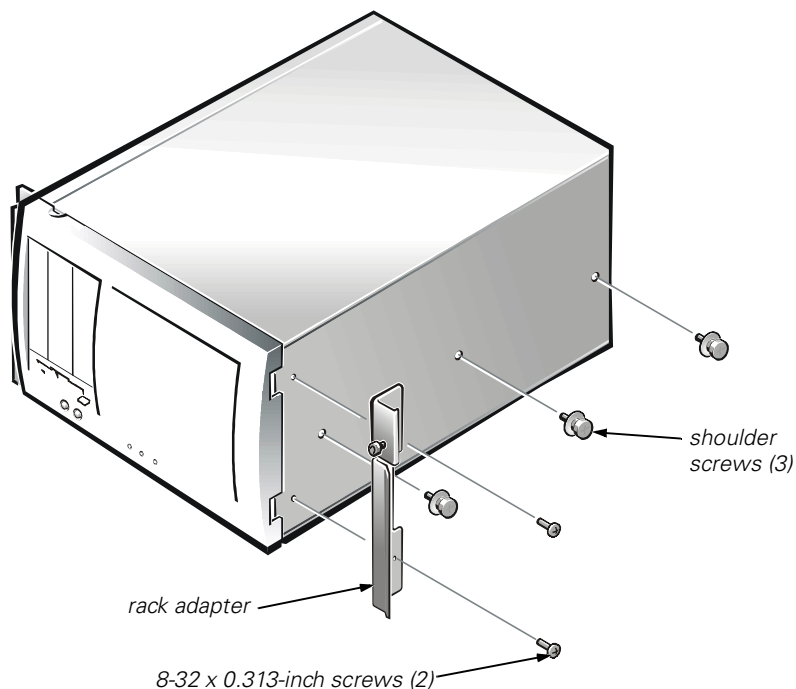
Installing the Rack Adapter and Shoulder Screws
